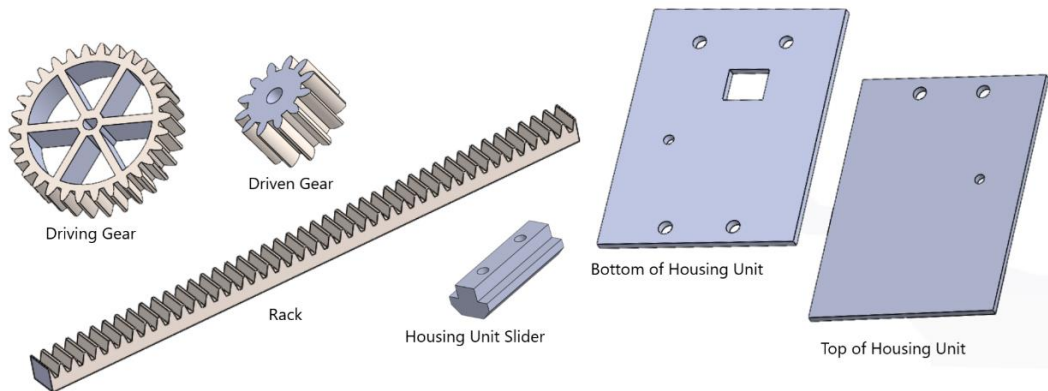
Image showing a collection of 3D modelled parts in SolidWorks of the camera module system.
